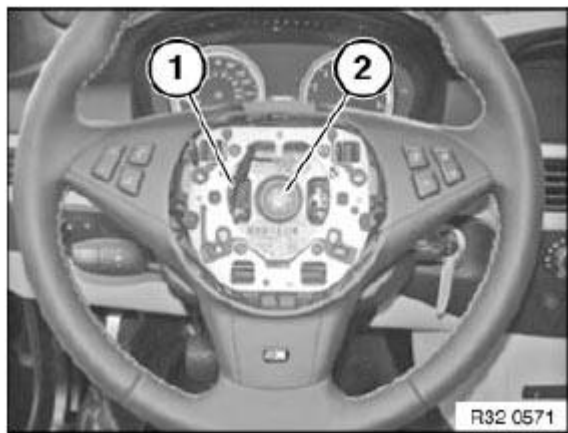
Identifying Plug Connection And Steering Wheel Screw
